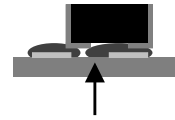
A solder bridge may form between both terminals under a component placed off-center.
